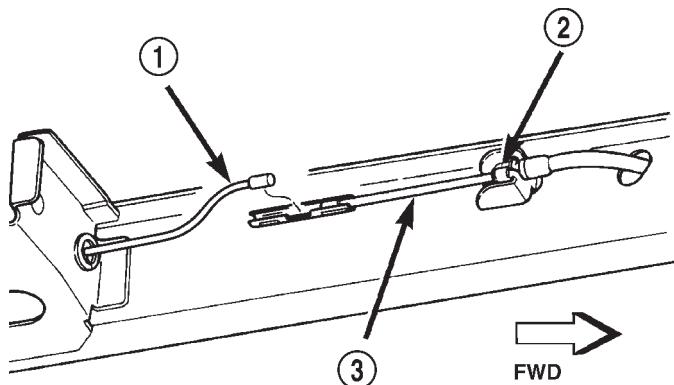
Intermediate Cable Attachment To Right Rear Cable
